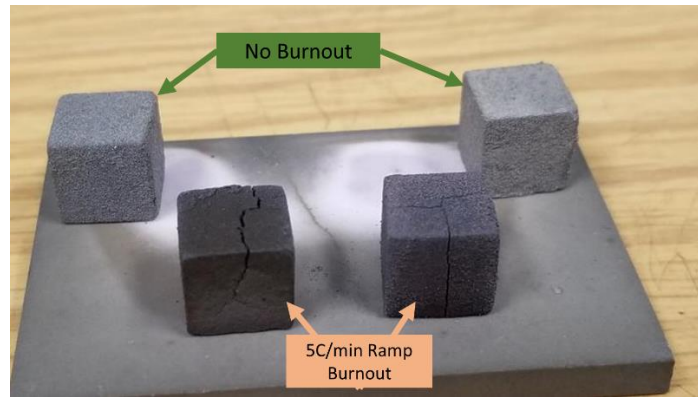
SEAM produced 4340 steel cubes using the installed mini elevator.
